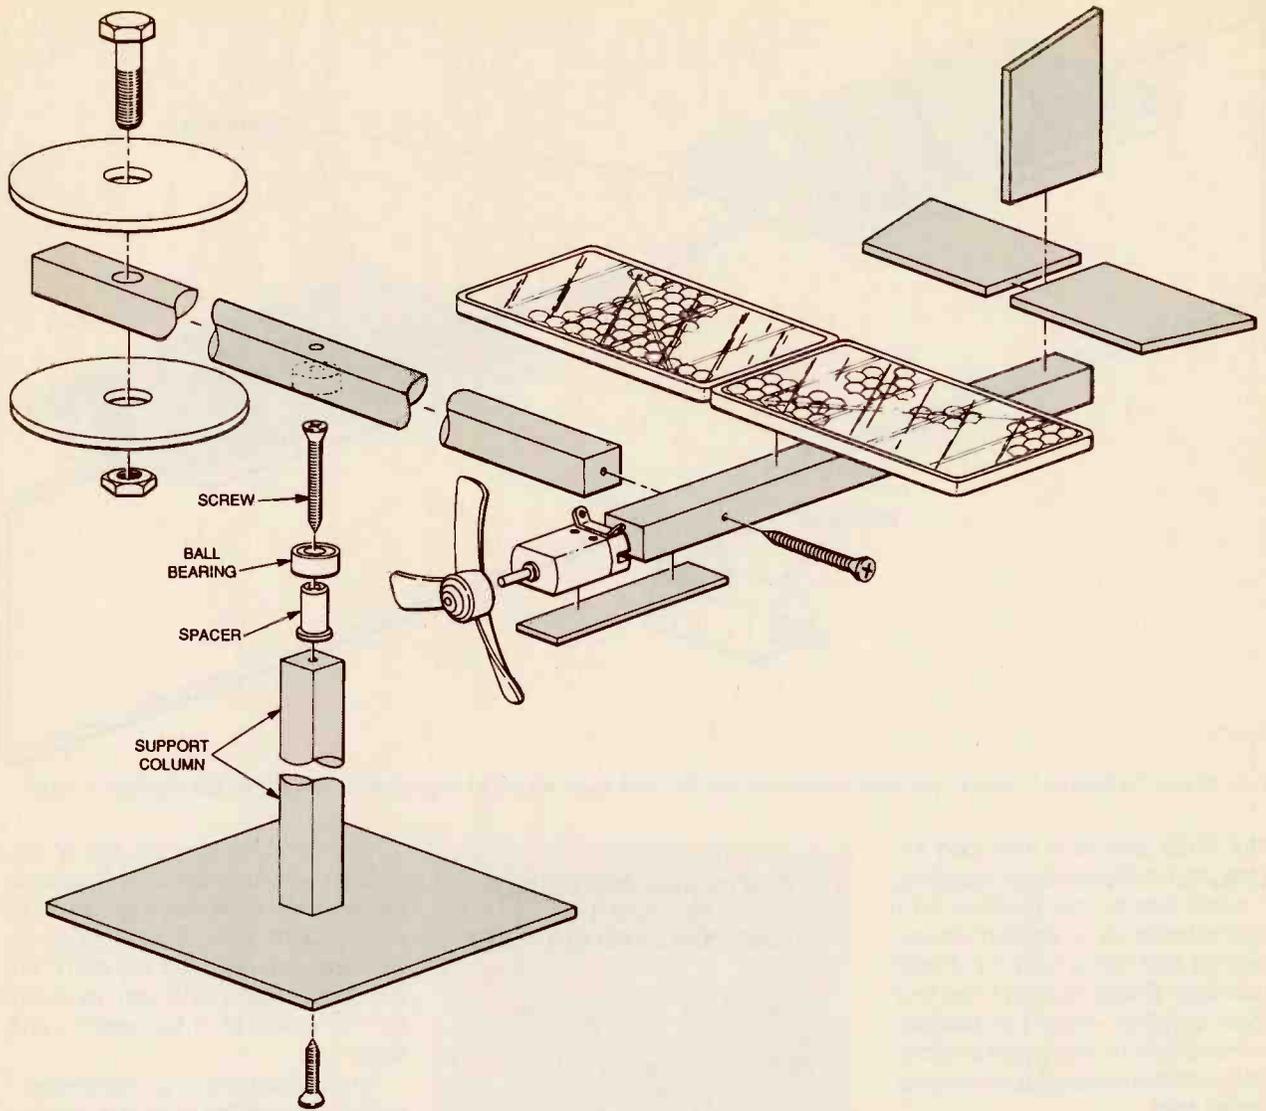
This is the general assembly of the airplane and its stand. Hot-melt glue, double-sided tape, and a few screws hold everything together.
